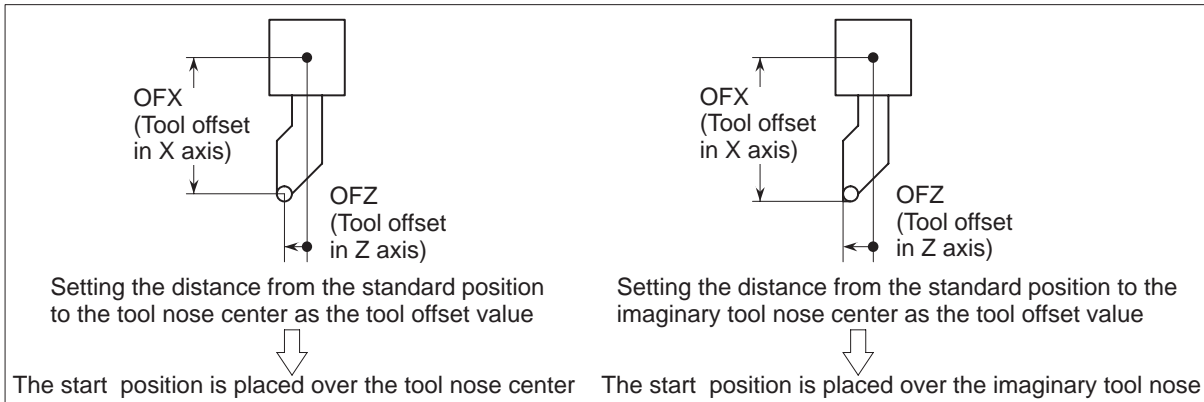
(a) Tool nose radius center and imaginary tool nose
